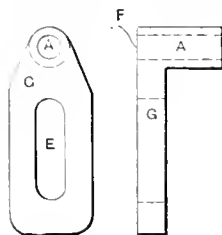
Device for Locating Holes for Punches in Punch Holders.
